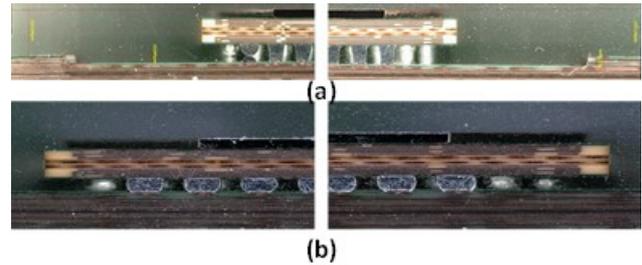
(a) Cross section U1 corners in the Cavity; (b) Cross section U2 corners on Board Surface
